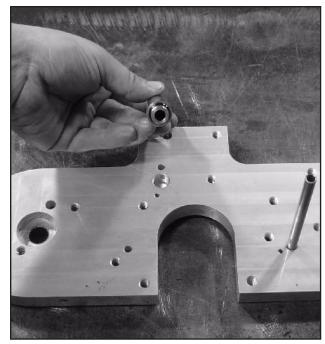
Replace o-ring on Pump Relief Valve and screw into Base Plate. Torque Pump Relief Valve to 310 in. lbs.
